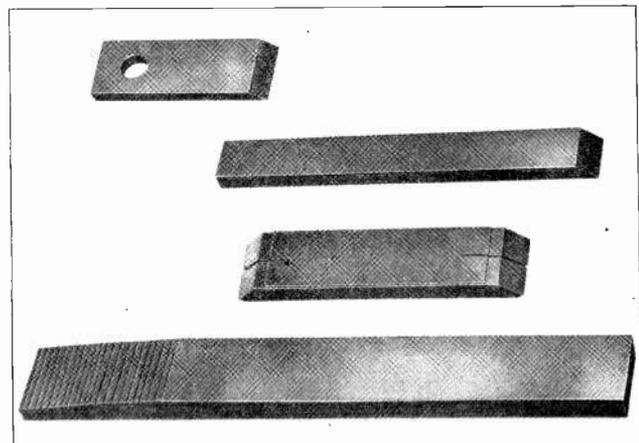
Brushes made of copper strips or copper "leaf" construction are often used for low voltage machines which handle very heavy currents.
